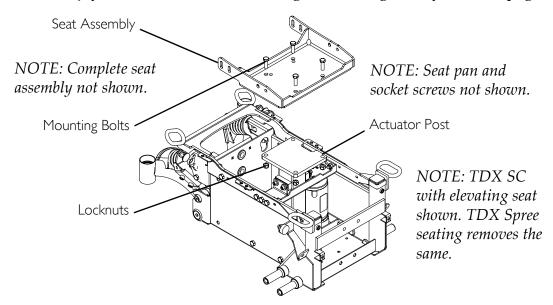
Removing/Installing the Elevating Seat Assembly
